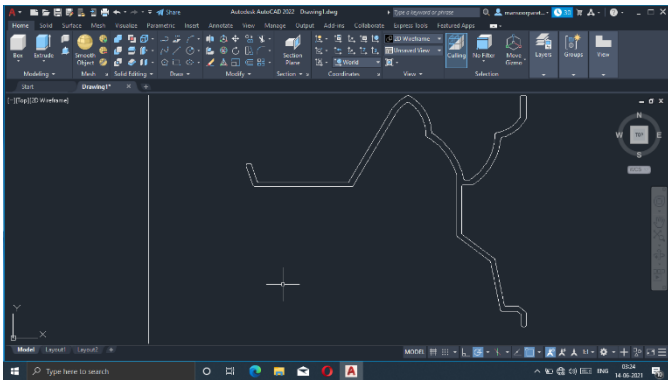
INITIAL DRAWING OF STEEL WHEEL
